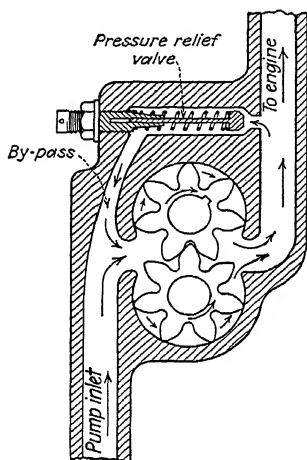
Schematic diagram of a gear-type oil pump.
